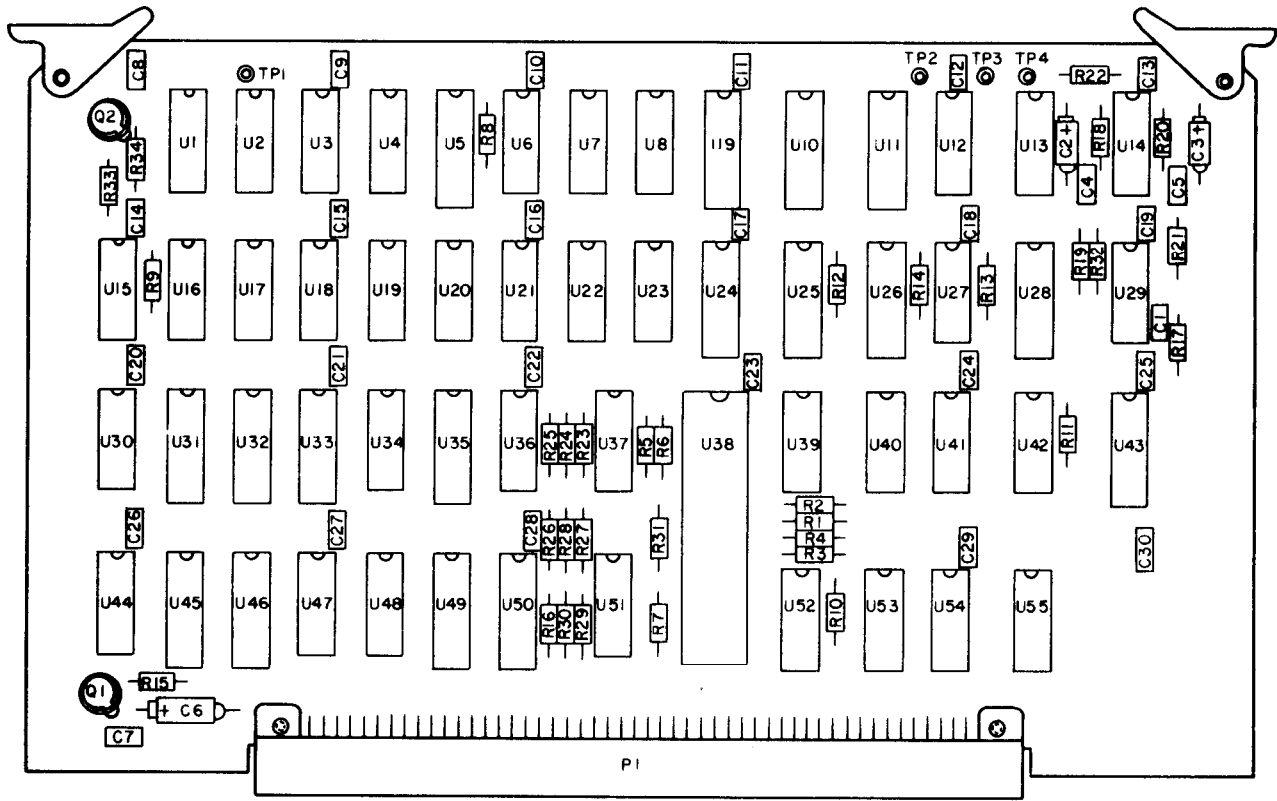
PRINTER CONTROL CIRCUIT CARD ASSEMBLY.
